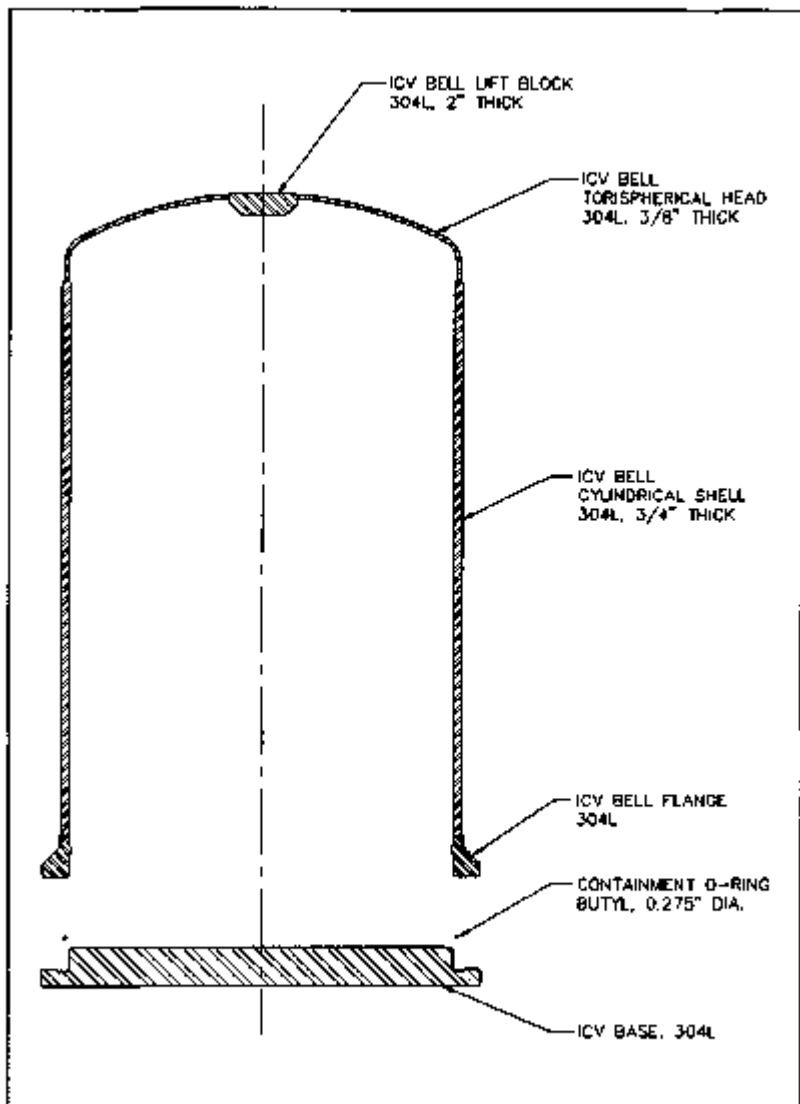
Exploded View of ICV Containment Boundary Components.
